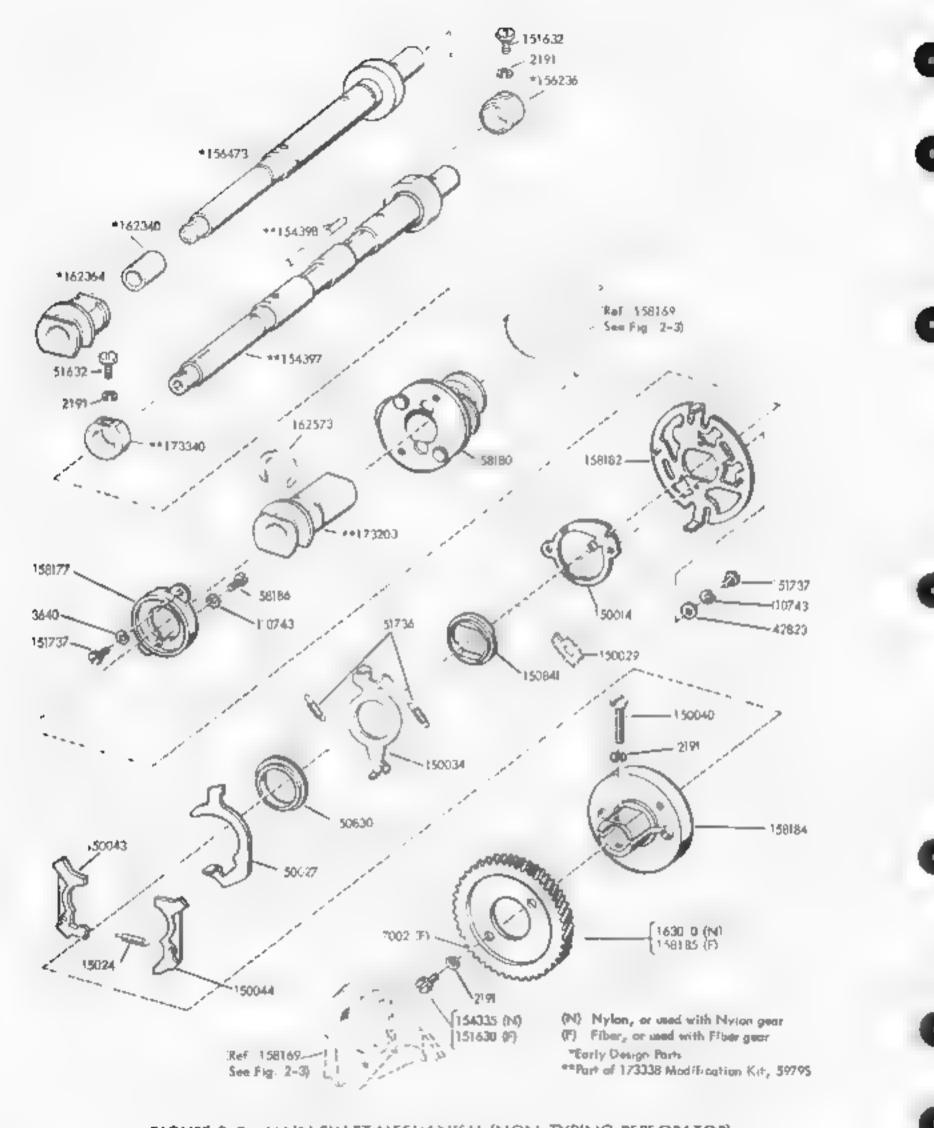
MAIN SHAFT MECHANISM (NON-TYPING PERFORATOR)
